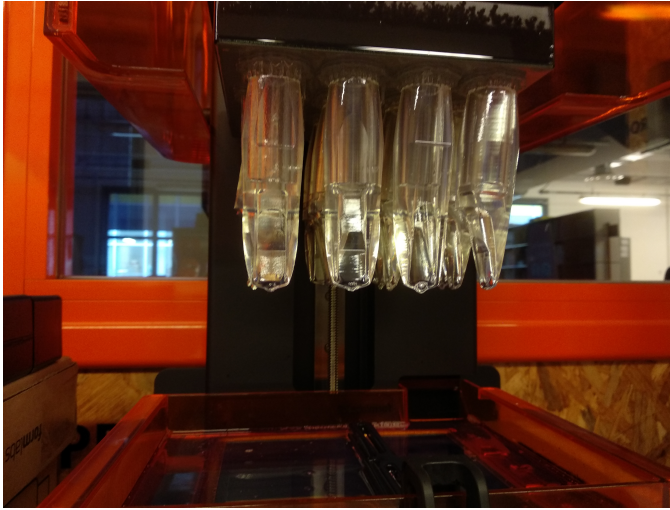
Prototyping of mouthpieces using a Formlabs (Form 2) 3D printer.
